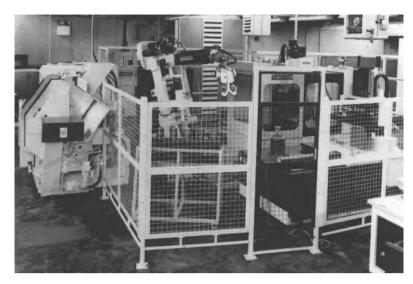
A typical FMC installation (developed by the author and a machine tool manufacturer) at "commissioning stage" during the late 1980s. Initially, the cell was comprised of a slant-bed turning centre, a vertical machining centre, a 6-axis robot and a coordinate measuring machine. Later additions included an optical tool presetter and modular quick-change tooling, together with a CAD/CAM DNC link. [Courtesy of Southampton Institute/Cincinnati Milacron.]
